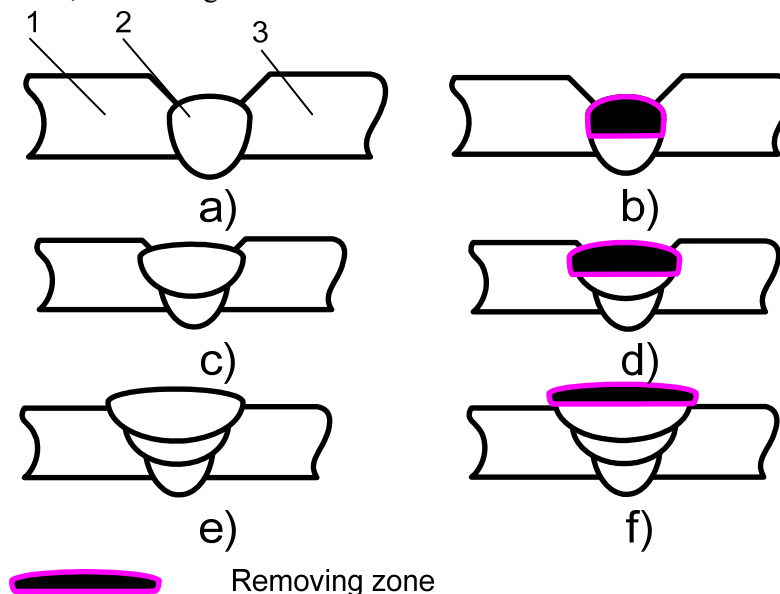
Reconditioning by welding application scheme using Half Bead Technique
